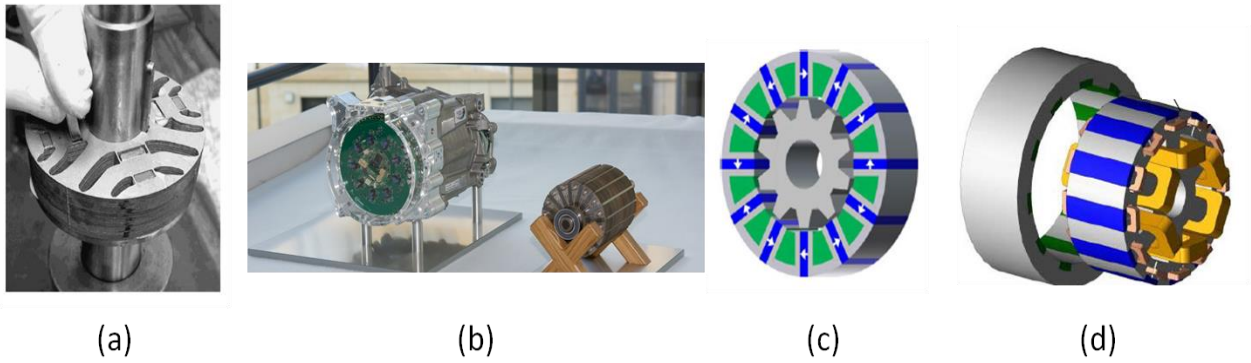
Examples of alternative magnet electrical machines (a) a rotor prototype of a PMASynRM and its magnet insertion process [44], (b) a prototype of ferrite magnet electrical machine with its rotor [45], (c) a 3D model of a typical FSPM [46], (d) a 3D model of a dual-sided PM variable flux memory machine [47].
